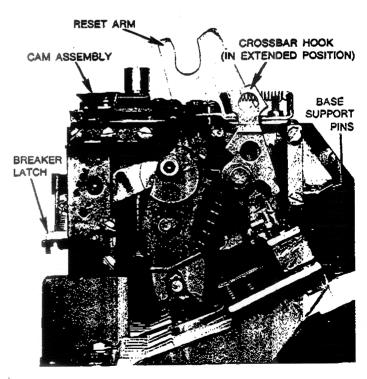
Cam and contact assembly as viewed through side of inner cover.
